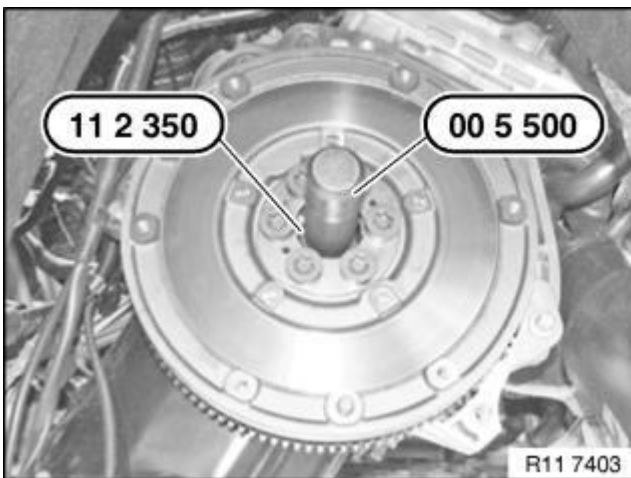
Installing New Thrust Bearing And Drive Firmly Home With Special Tool
